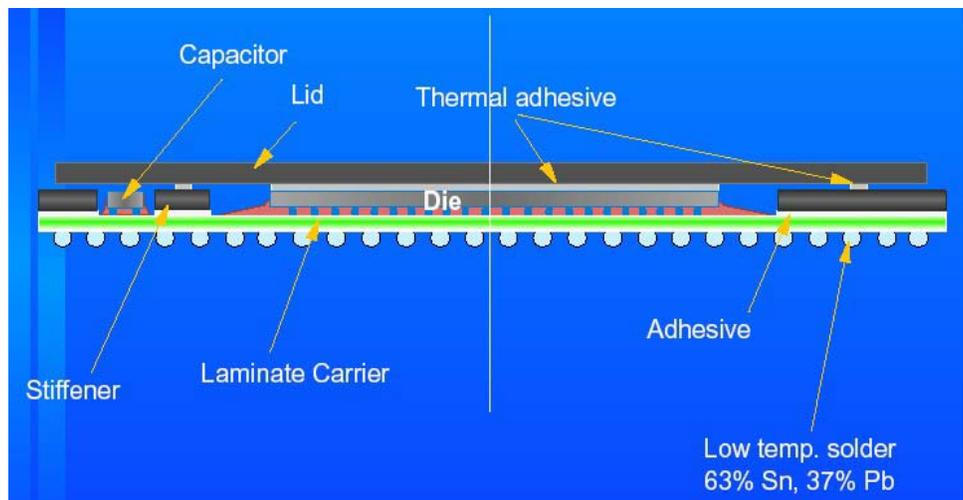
2577 I/O BGA Pictorial Cross-Section (IBM Packaging ASIC Overview (April 2001)).
